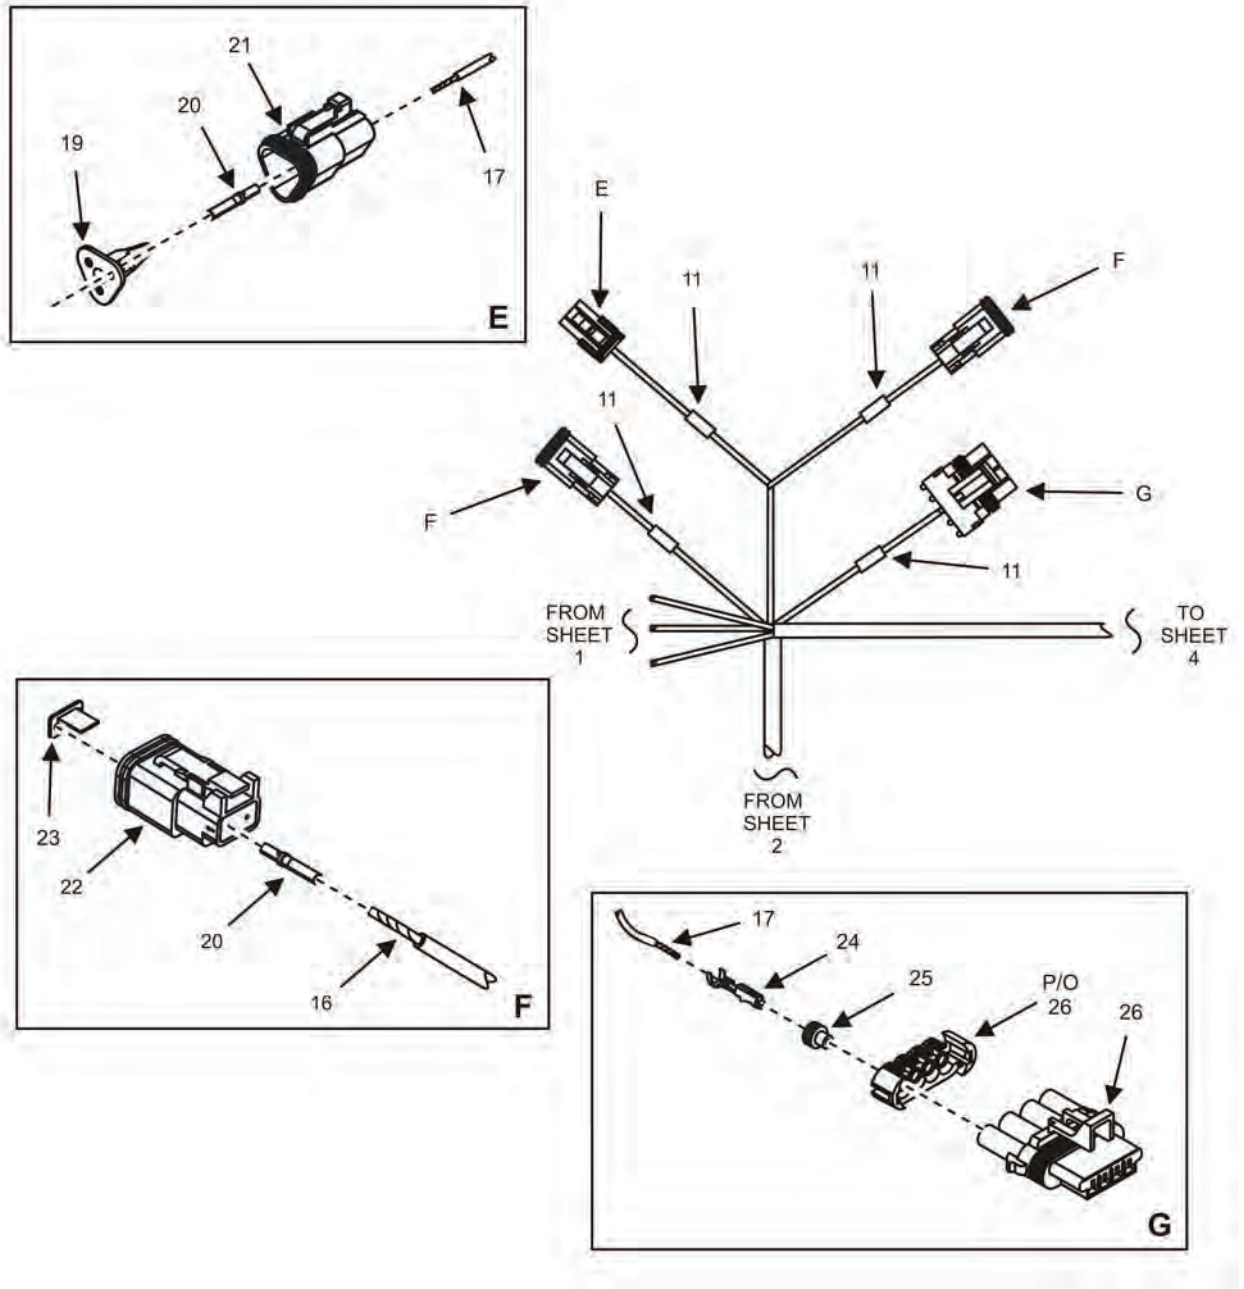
Engine Wiring Harness (Sheet 3 of 13).
